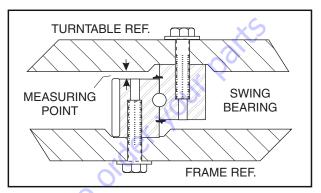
Swing Bearing Tolerance Measuring Point
